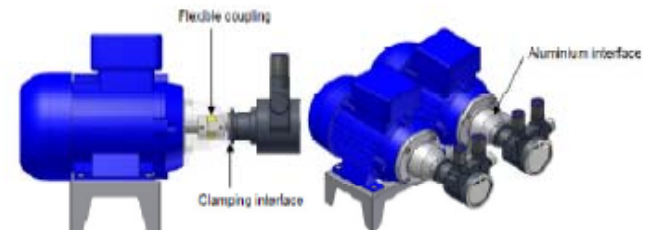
Clamping Interface on the Pump & Motor Assembly
